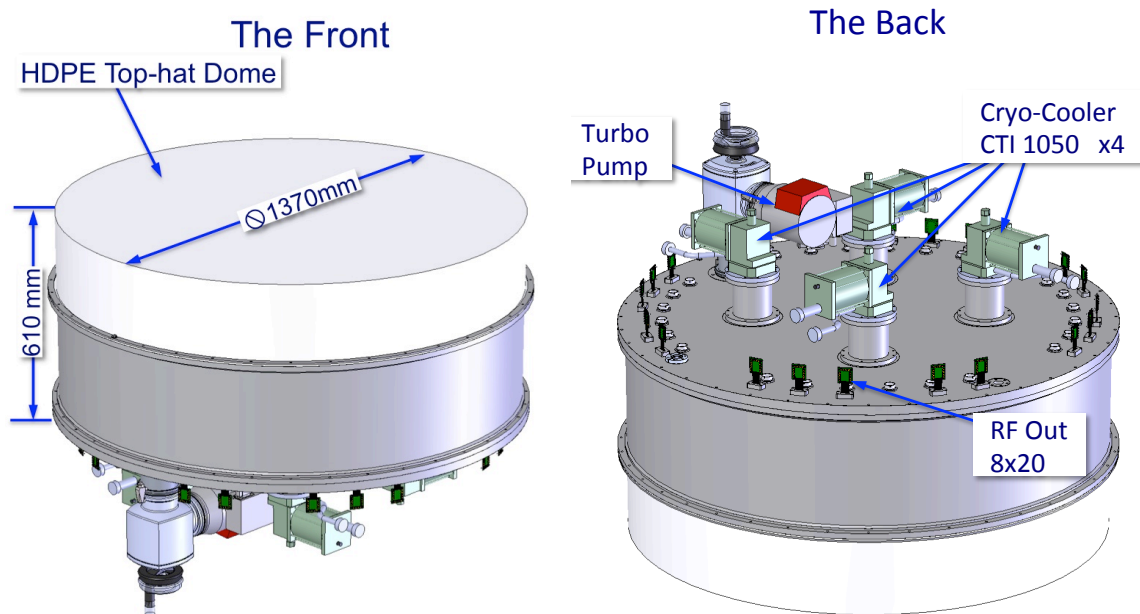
Left:* Front view of the Cryo-PAF front-end camera, with relevant dimensions. *Right:* Back view of the front-end camera, indicating the 4 cryo-cooler heads, turbo-pump and the 160 RF channels out.
